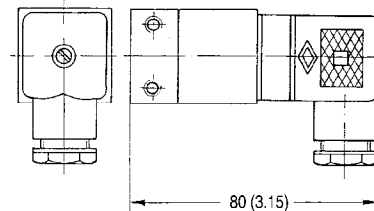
Contact Kontakt K17, dimensions in mm (inches)
